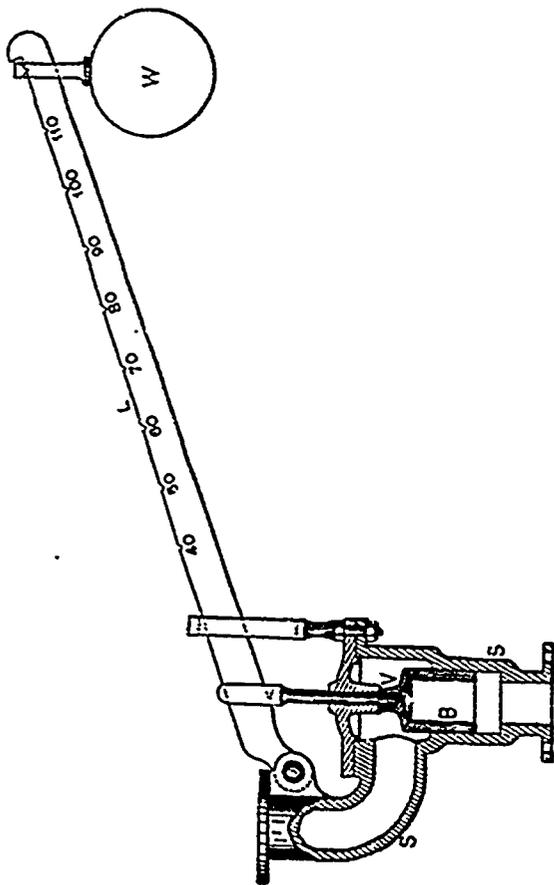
VALVE AFTER THE DEVIL GOT INTO THE BOILER.
